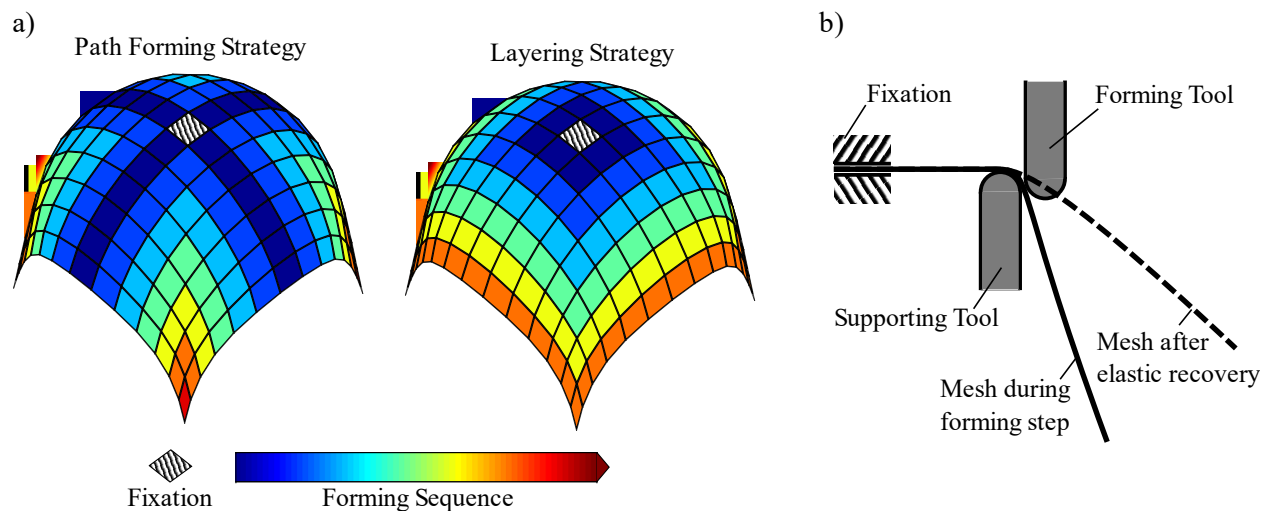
a) Forming Sequences for a hemisphere according to path forming and layering strategies, b) schematic sketch of die-less forming of a wire mesh with two forming tools during and after a forming step
